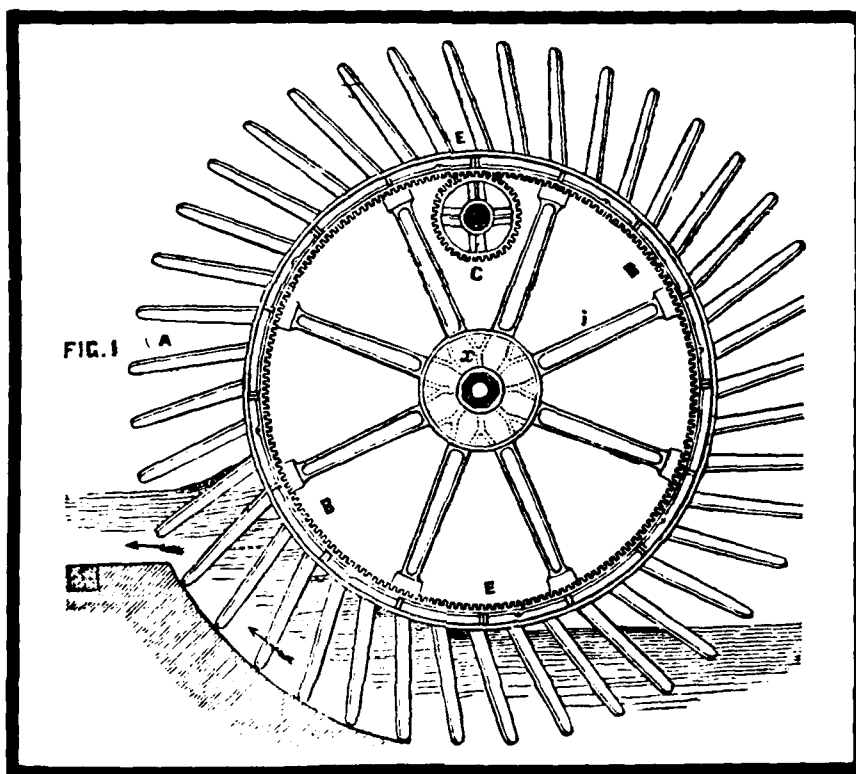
Side view of scoop wheel of a drainage machine (De Bow 1847:72).
